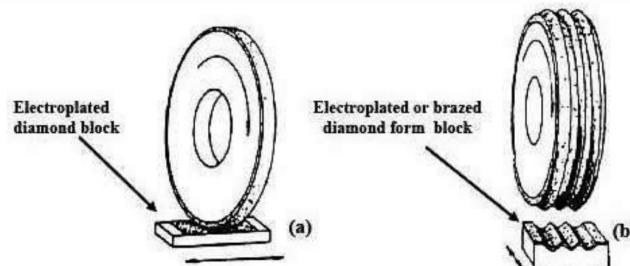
Diamond form truing block to true (a) a straight faced wheel (b) a form wheel
